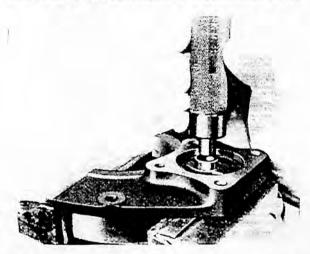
FITTING NEW ROTOR SHAFT BUSH TO LOWER HALF BEARING HOUSING. SERVICE TOOL MF130
